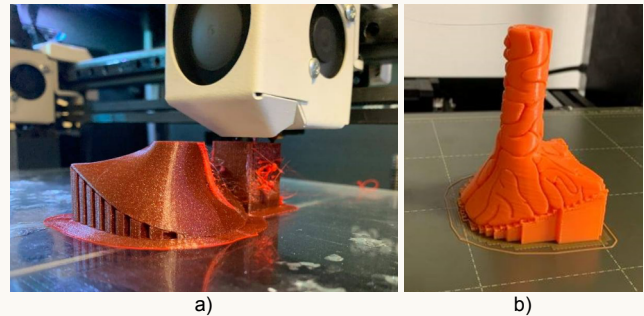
3D printing of heel prototypes: a) prototype 1 and b) prototype 2
